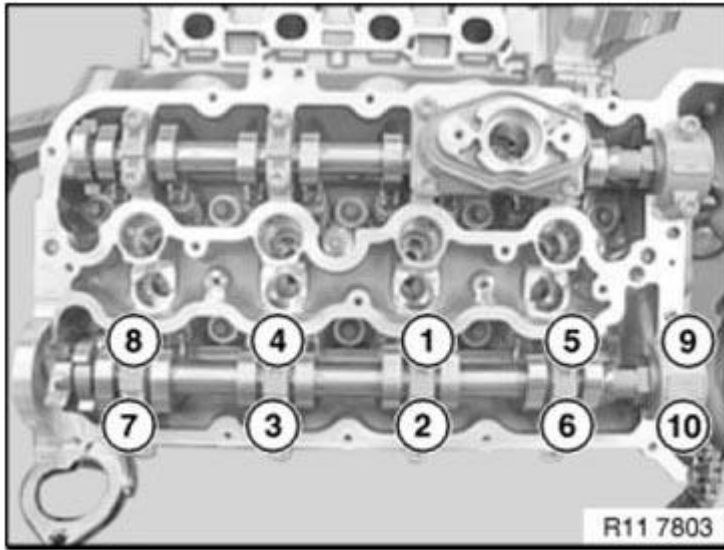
Identifying Camshaft Bearings Bolts Tightening Sequence
